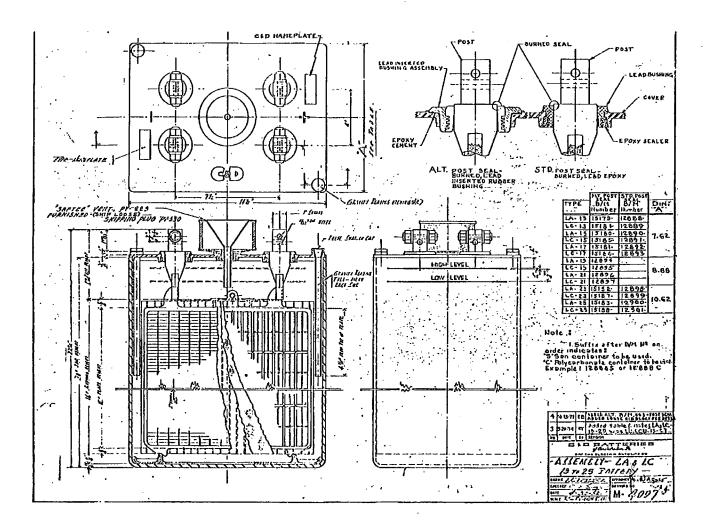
Construction Details for Types L0-15, L0-21, L0-25 and LCU-27
